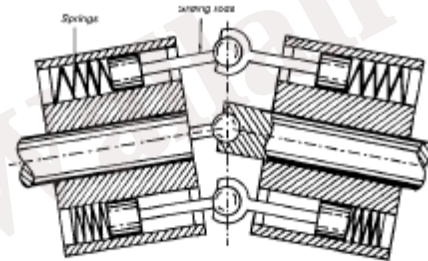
This pump-type coupling has the reciprocating action of sliding rods that can drive pistons in cylinders.
